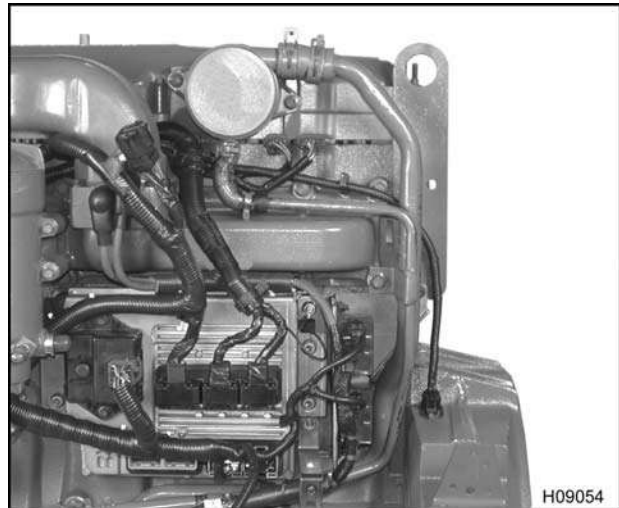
ECM, IDM, EGR drive module, and tube assembly overview
